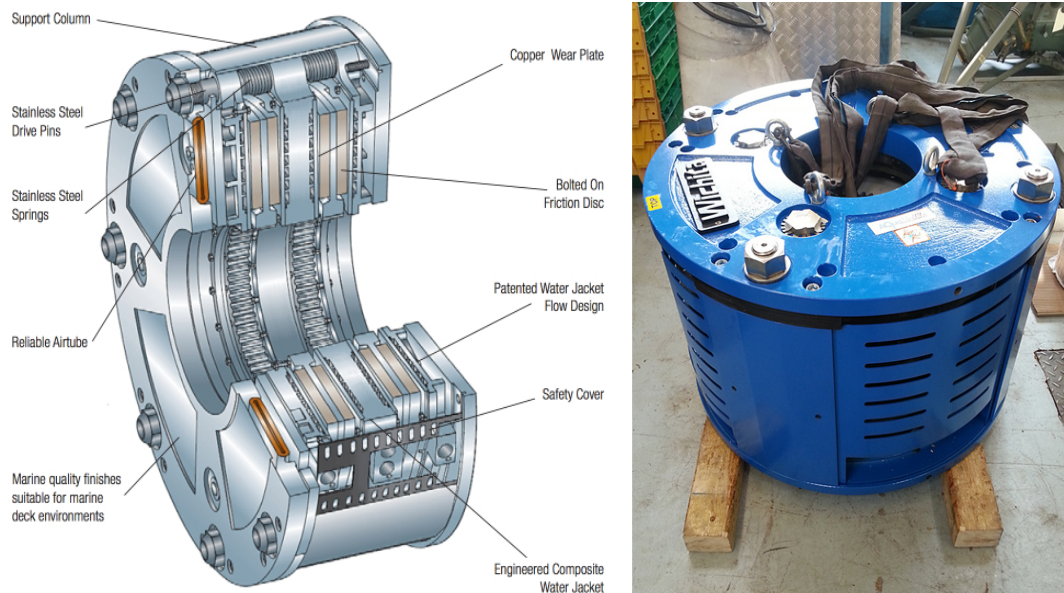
Wichita Clutch and Brake Cutaway (Left) and Assembly (Right)
